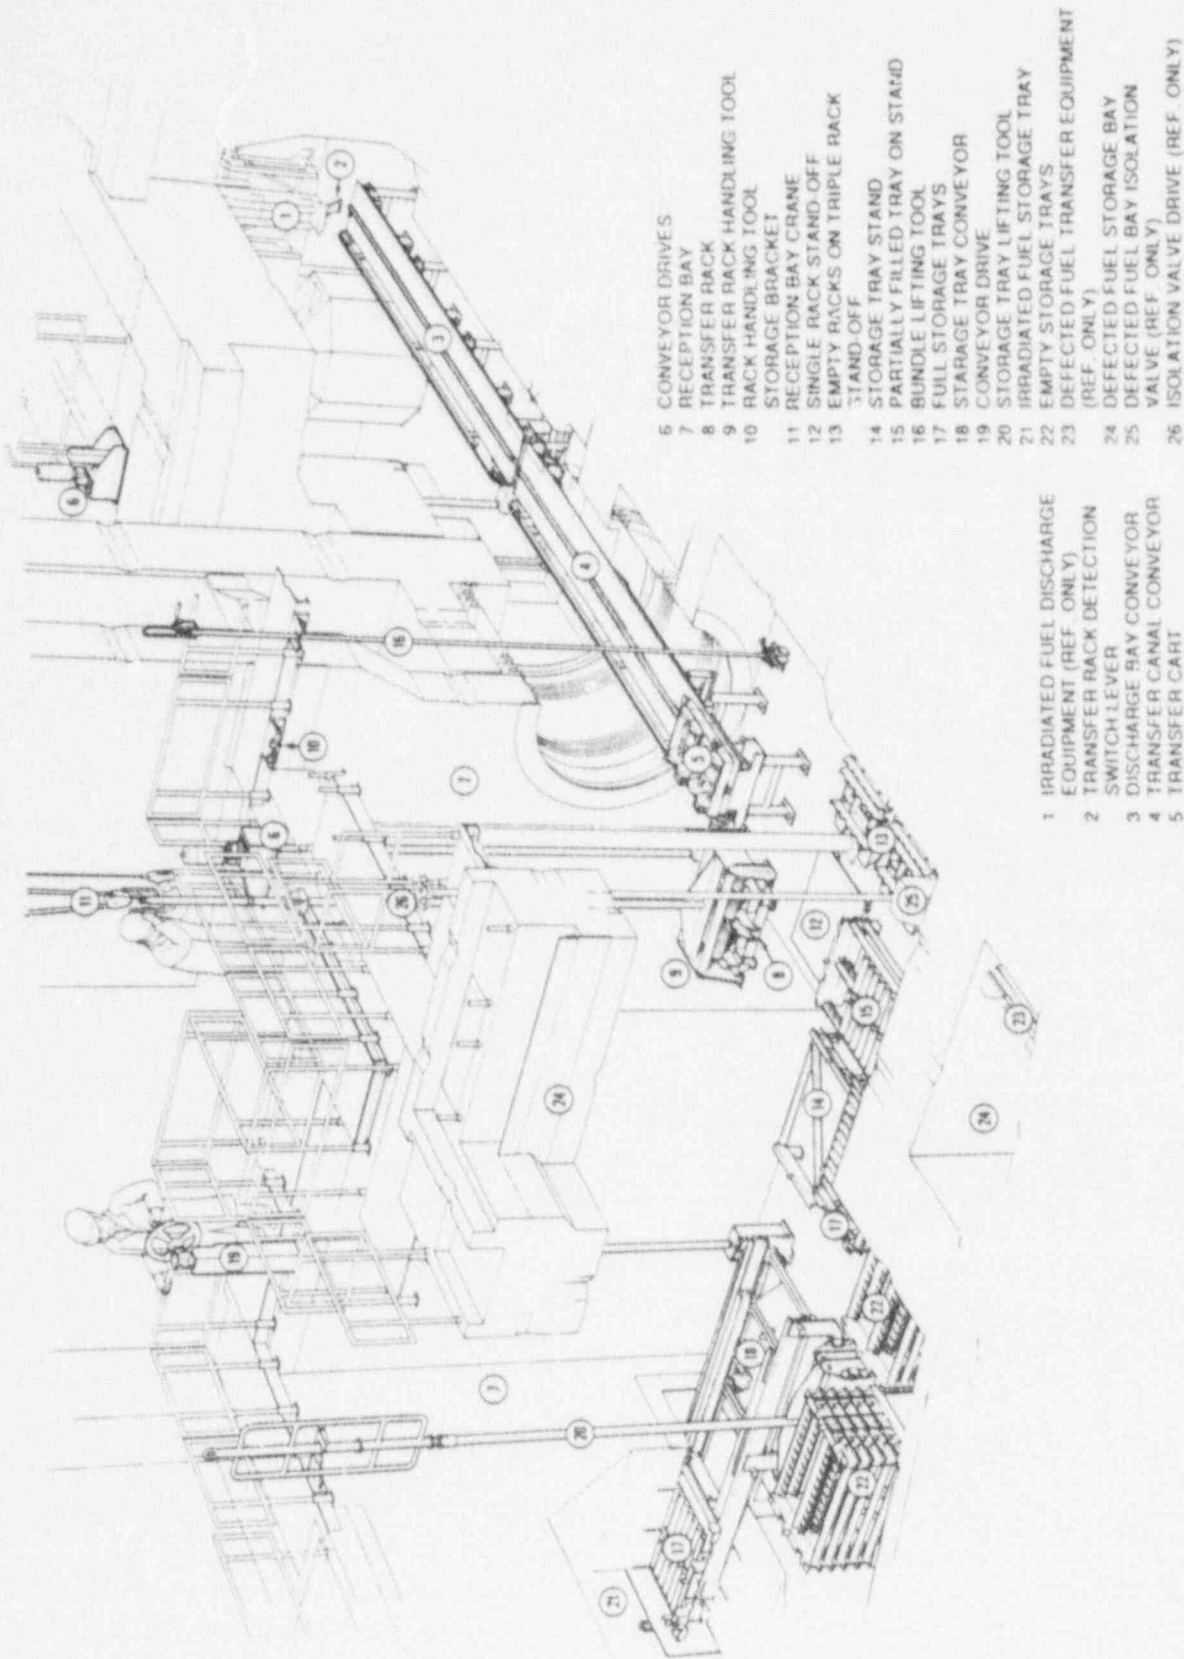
IRRADIATED FUEL TRANSFER EQUIPMENT
